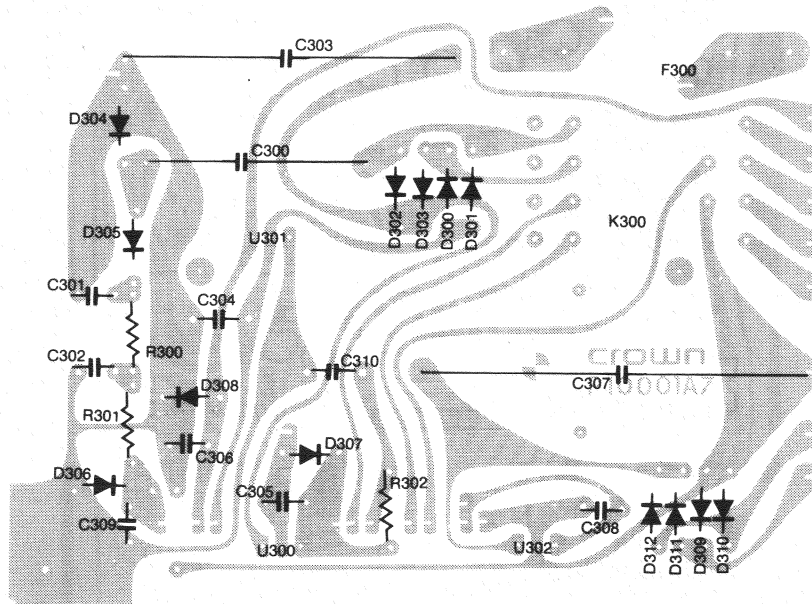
Power Supply Foil Board Layout; #Q42468J0
